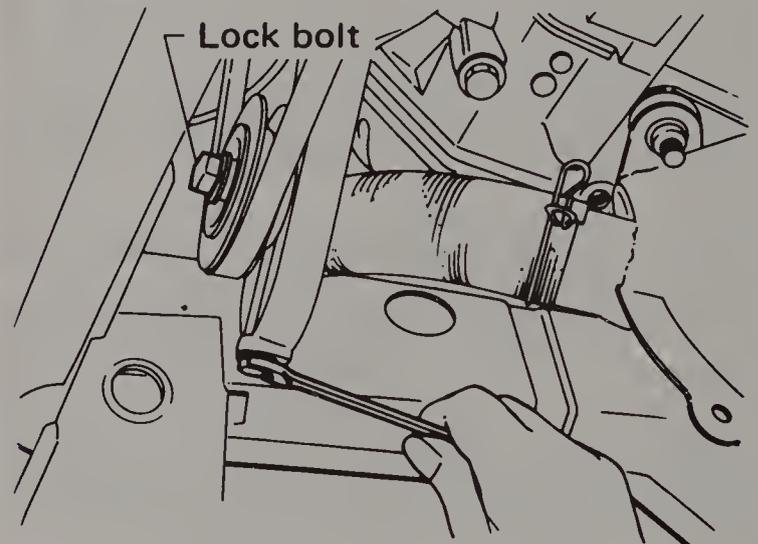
Adjusting the power steering pump drivebelt tension (Sec 11)
